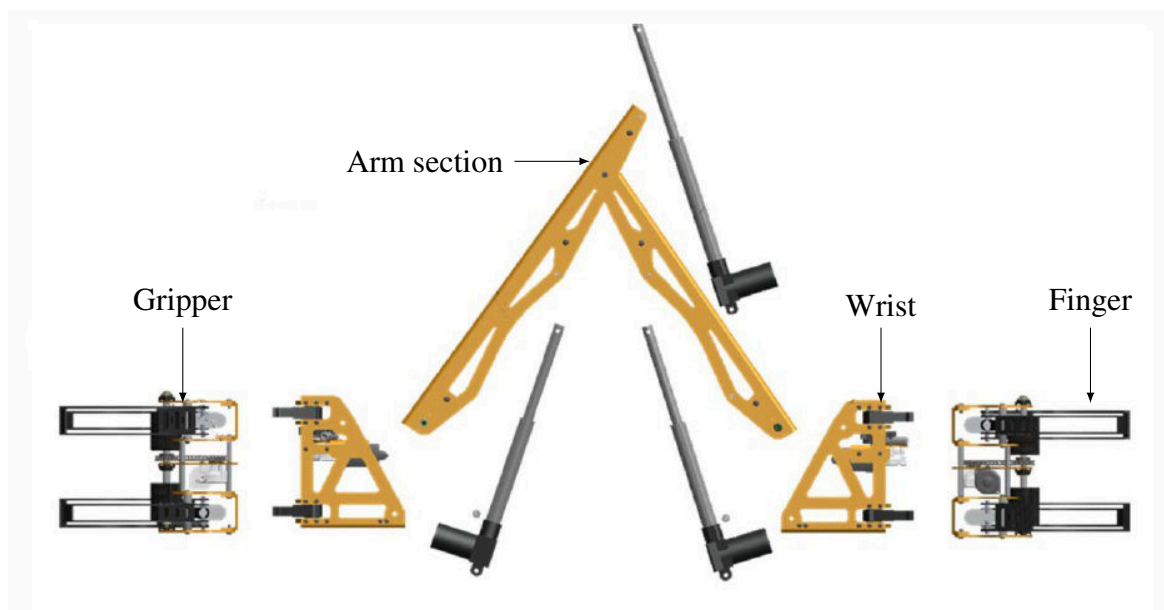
Exploded view of tree-to-tree machine, adapted from [91]
